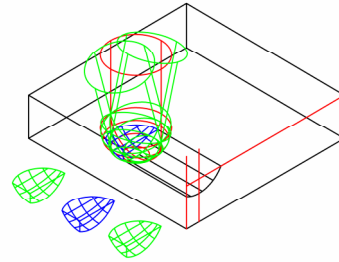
Ball end milling with tilt angle (uncut chip).
